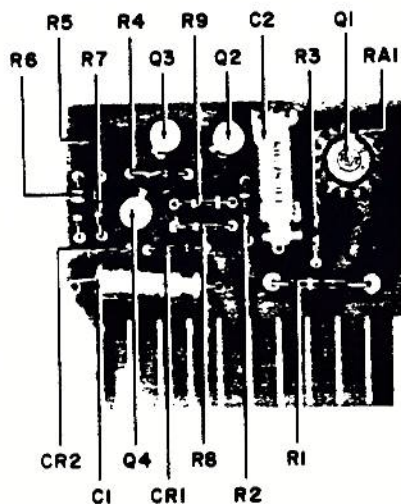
Type 76124 +18V Power Supply Regulator, Component Locations
